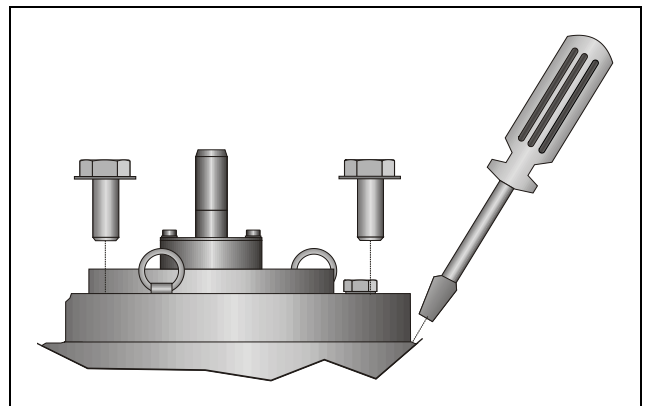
Loosening and removing the hexagon screws on the filter cover
